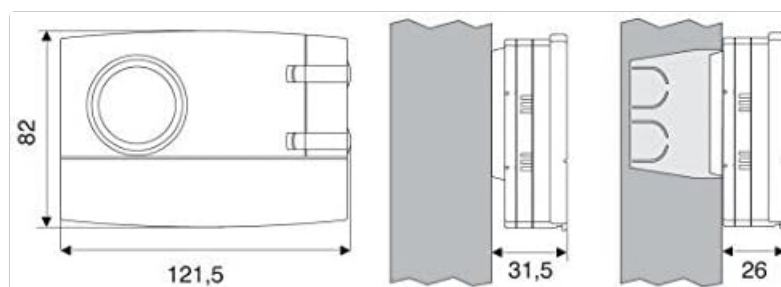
Technical drawing illustrating the dimensions of the thermostat (121.5mm width, 82mm height) and various mounting options, including flush and surface mounting, with depth measurements.
